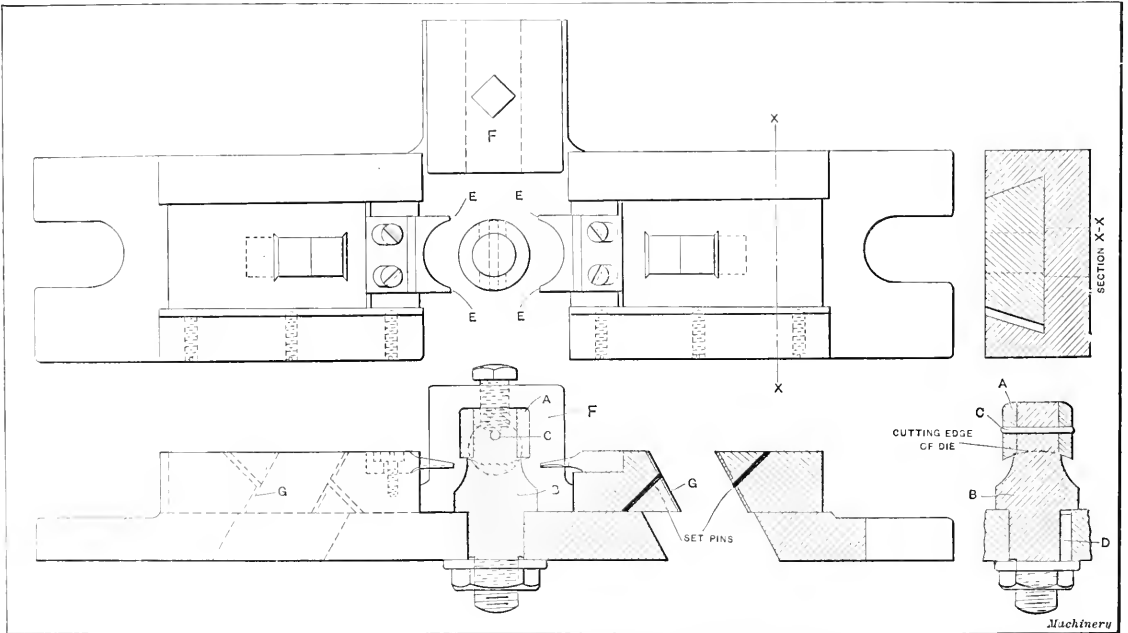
Die-bed equipped with Tools for clipping Shell shown in Fig. 1
